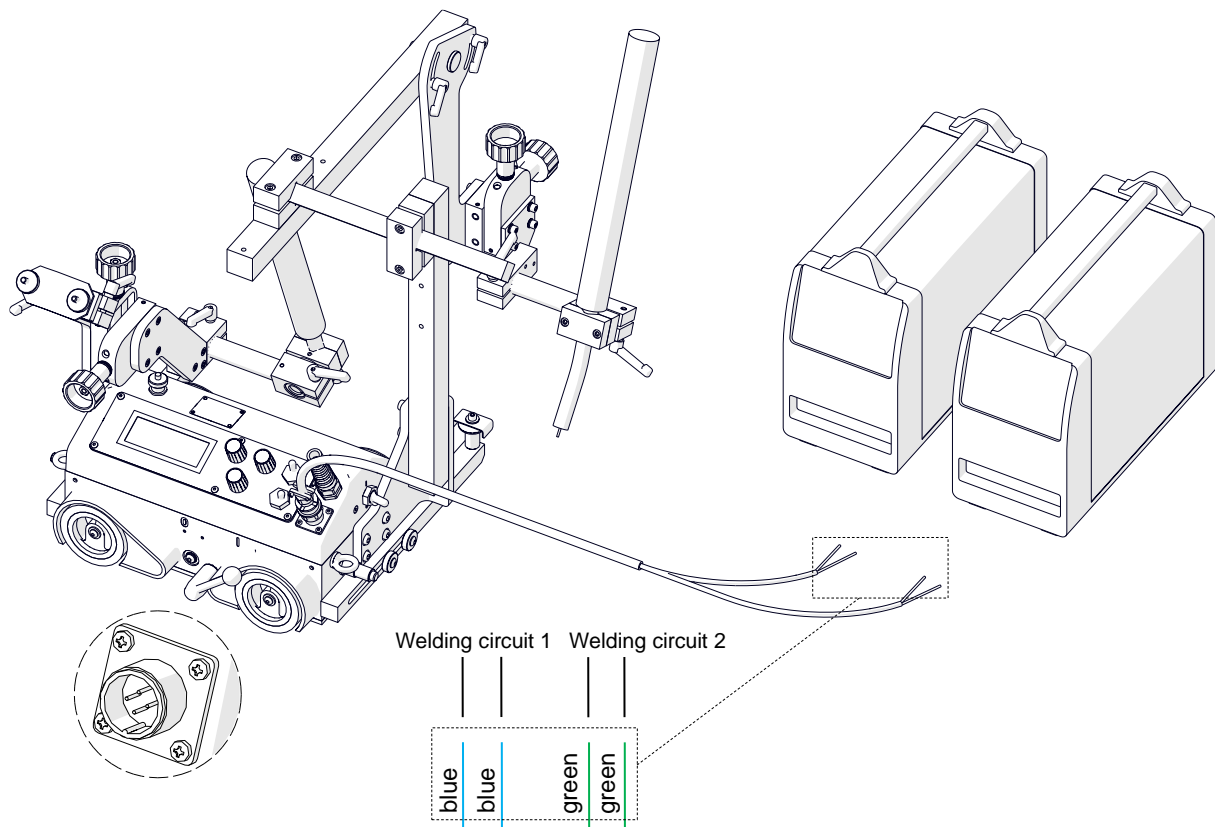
Connecting the arc ignition cable to welding circuits
